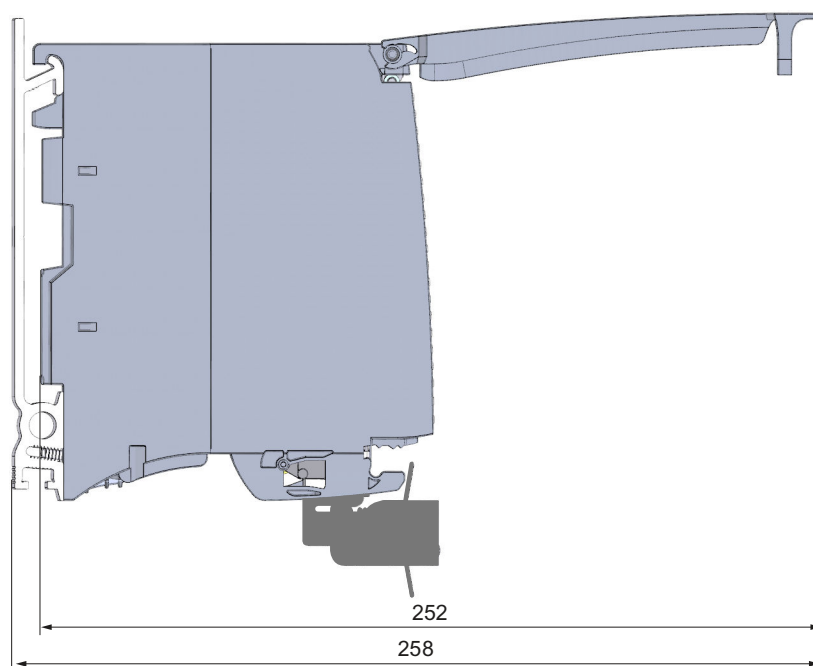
Dimension drawing of the AI 24xCVM HF module, side view with open front flap
